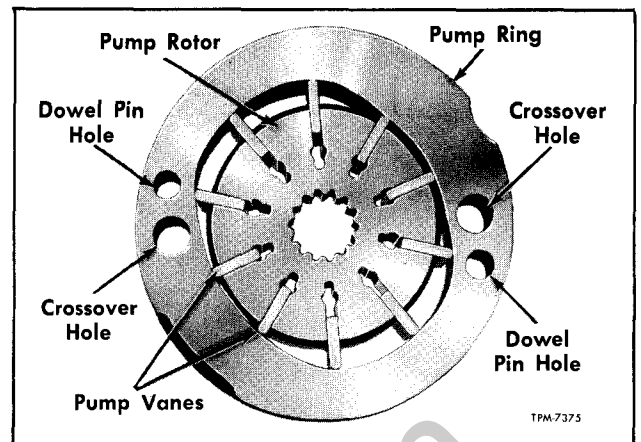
Cross Section of Rotor and Vanes in Pump Body
